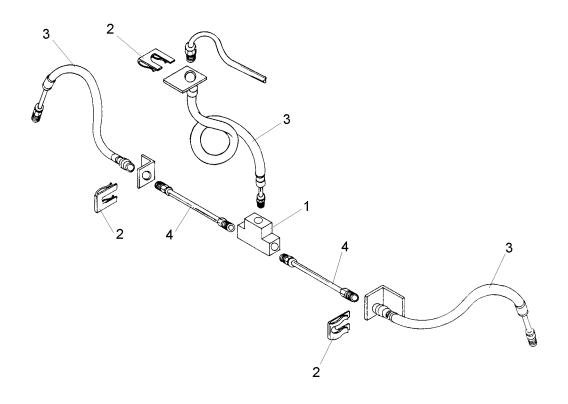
A: Brake Line Assembly, Front Disc Brake Option
